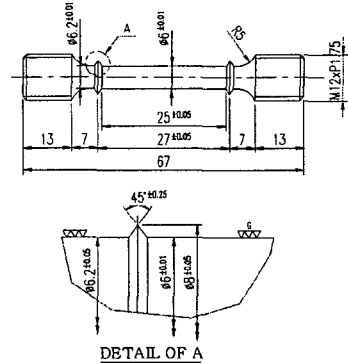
Shape and dimension of high temperature tensile and creep specimen (ASTM E139-83)
